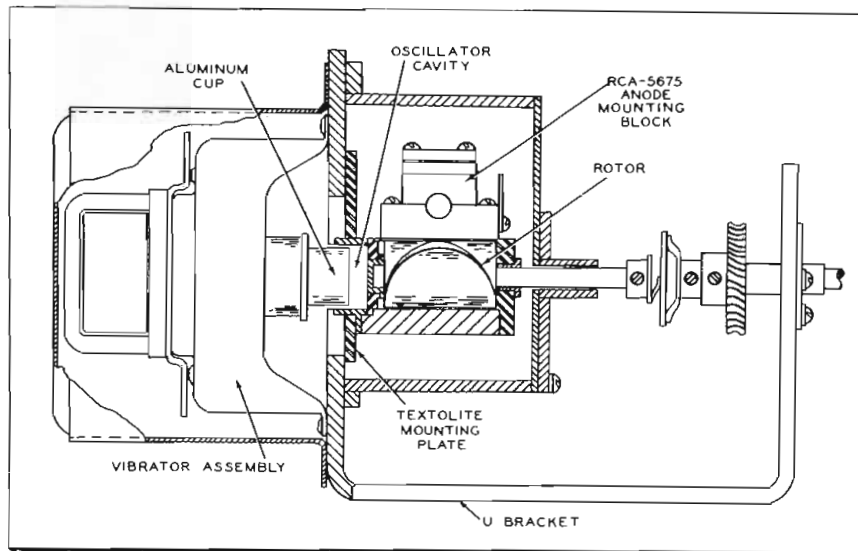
Cross-section of oscillator showing support bracket, shield cans and vibrator mechanism
